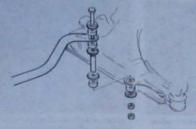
Front anti-roll bar connecting link arrangement (Sec 6)
